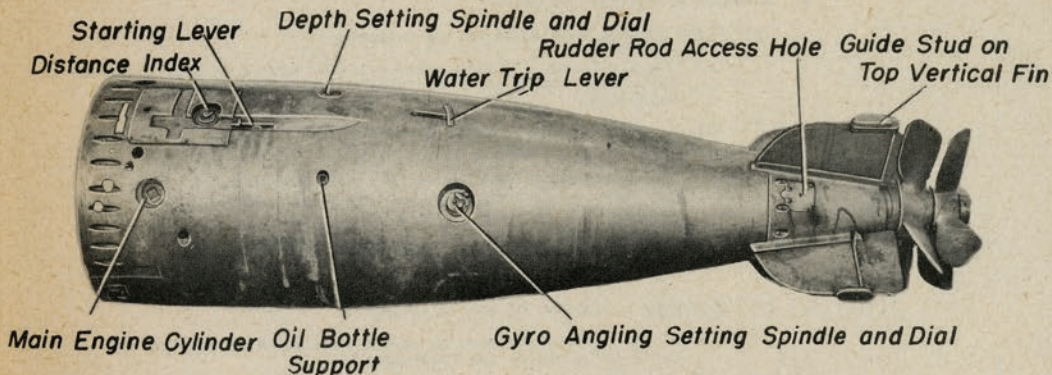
Torpedo Sixth Year Type, Afterbody, Top View
